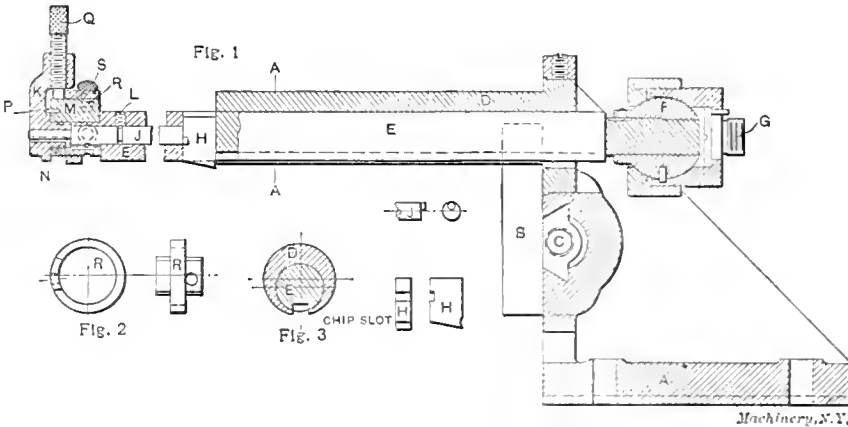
Section through Cutter-bar of Key-seating Attachment.
